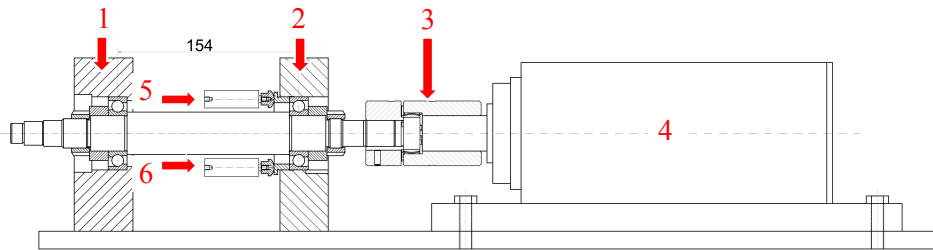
Schematic diagram of investigated spindle with drive motor: 1 – front support, 2 – rear support, 3 – ROTEX coupling made by KTR 4 – high-speed drive motor, 5 – piezoactuator PST 150/10/40 VS15 made by Piezomechanik GmbH, 6 – touch displacement transducer MDKa-F1 made by VIS
